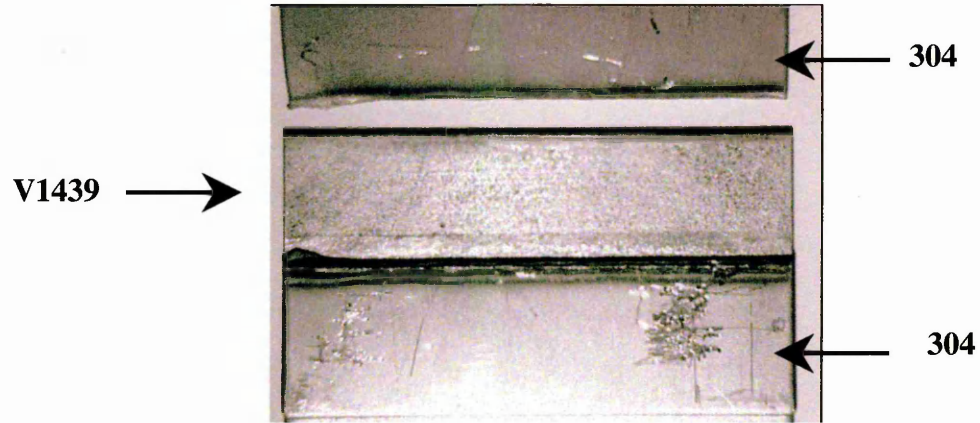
Shows a fatigue specimen in which fatigue failure occurred in the 304
